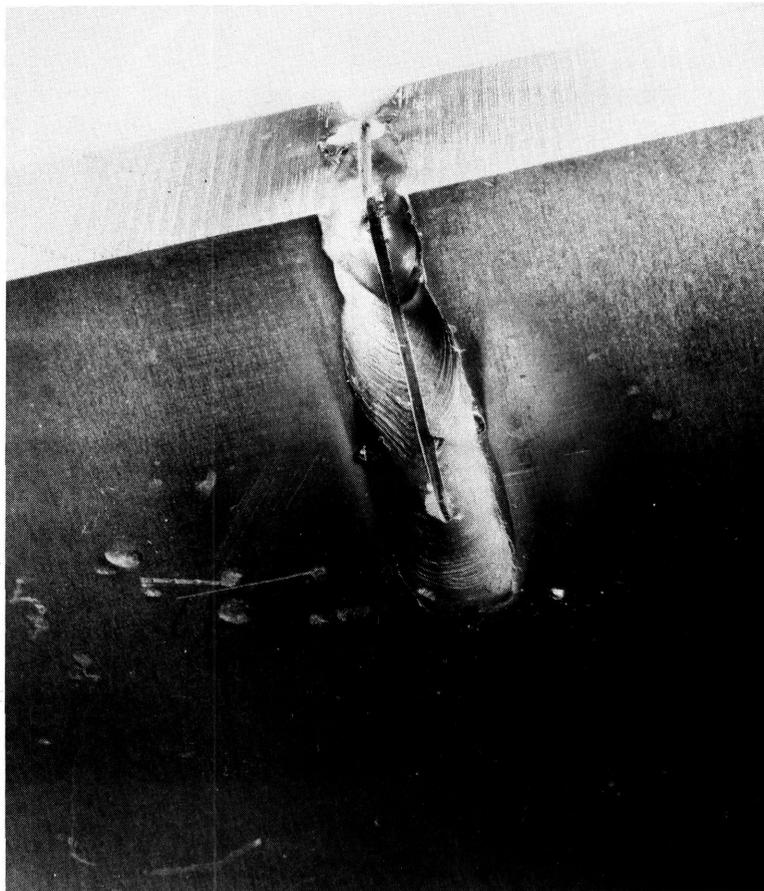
Aluminum alloy drop-weight tear specimen with electron beam crack starter weld
